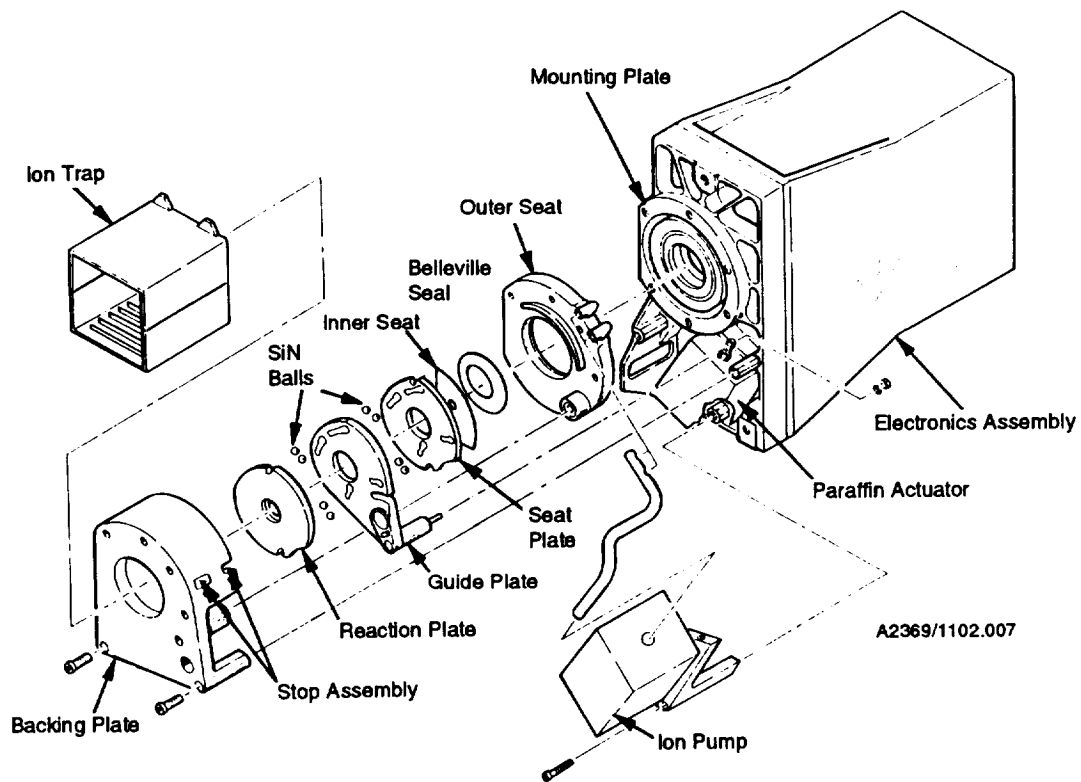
Isometric Exploded View of Openable Cover/Vacuum Seal Mechanism
